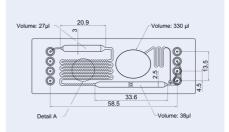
Detailed schematic drawing of finger pump mixer Fluidic 999
